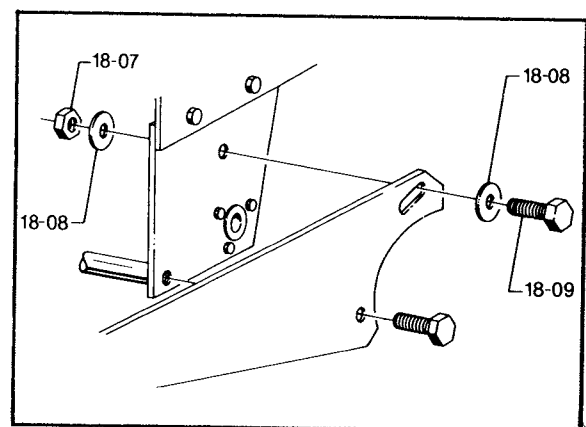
Fasteners used for installation on all models of case sealers EXCEPT 7A Model 176 & 7R Model 176.
